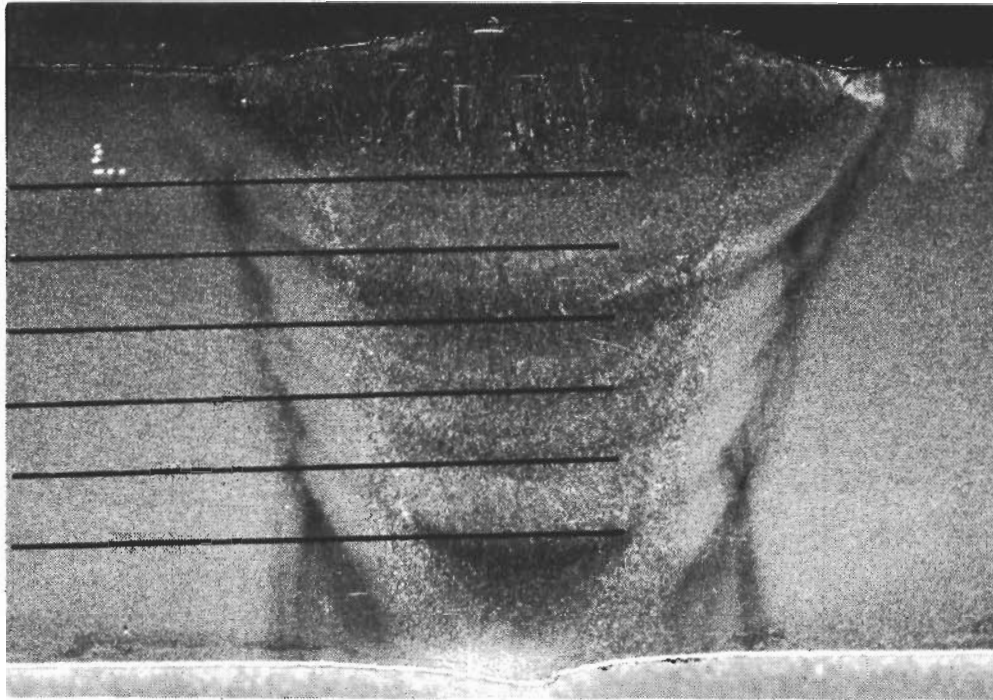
Typical Results of Macrostructure and Microhardness Evaluations of Grade 250, 1/2-In.-Thick, 18% Nickel Maraging Steel Plate Weldments Using TIG Process, Welded With Six Weld Passes and Aged at 900°F for 8 Hours, Heat 120D163 Filler Wire 7C-093
